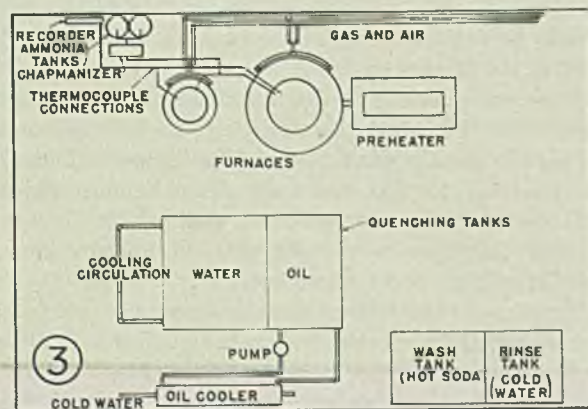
Floor plan of hardening setup. Note location of Chapmanizer in relation to other equipment—upper left corner. All photos courtesy American Gas Association
